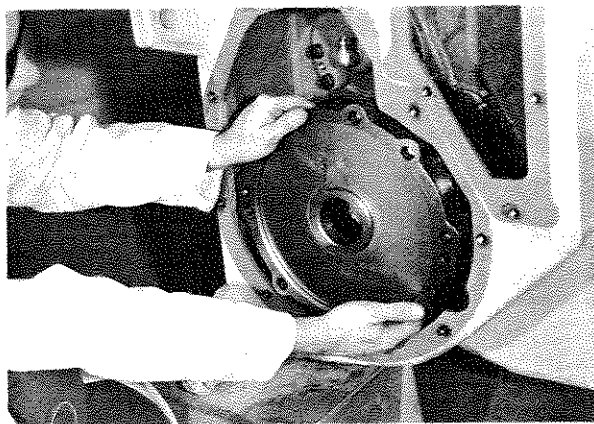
Removal And Disassembly Of Oil Brake Assembly, Power Controlled Winch (Sheet 1 of 2)
